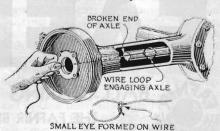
A loop in a piece of stiff wire used to remove broken axle without disturbing cover.
